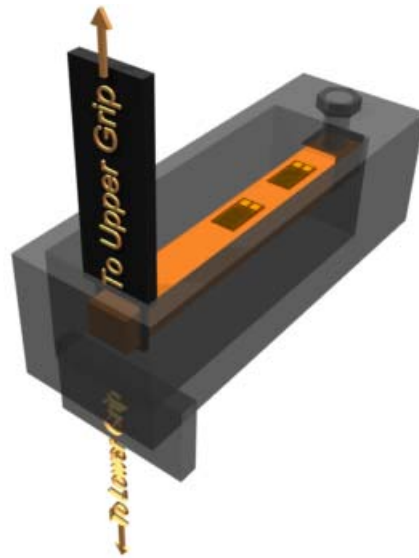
A 3-D rendering of the cantilever beam bending fixture designed to determine bending stiffness at LN2 temperature. Outer housing is shown partially transparent to reveal the inside assembly of the fixture.
